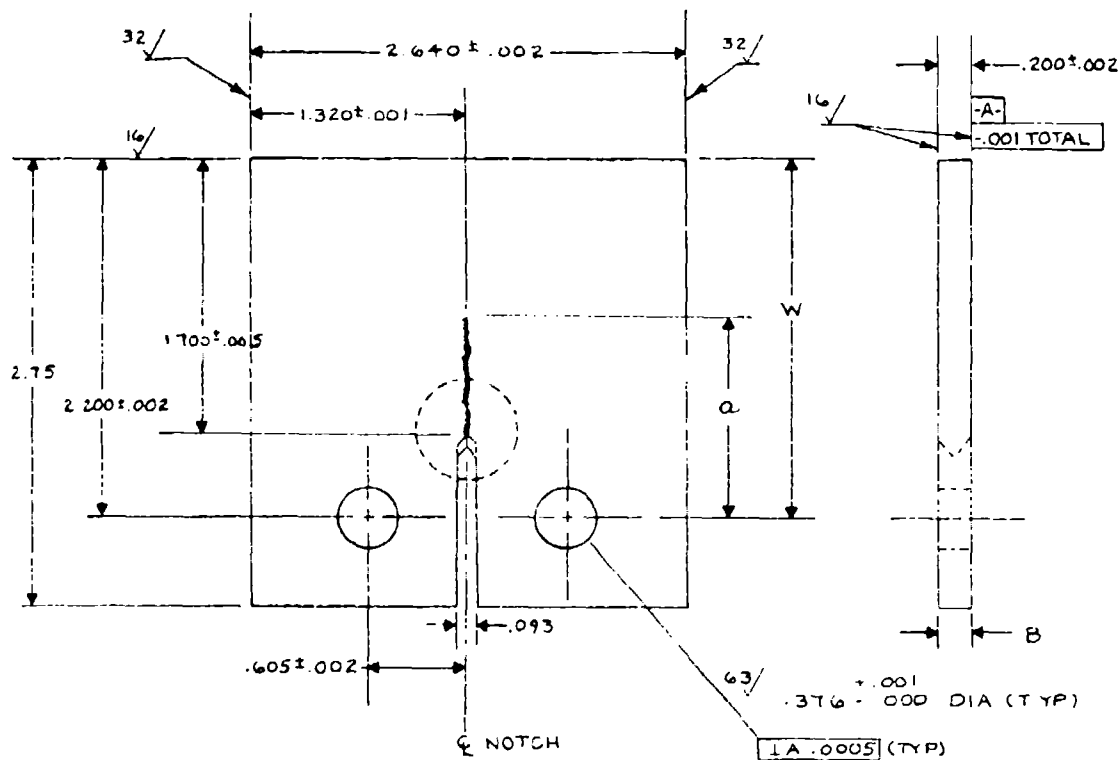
Modified Crack Propagation Specimen for ZE41A-T5 Welded Magnesium
